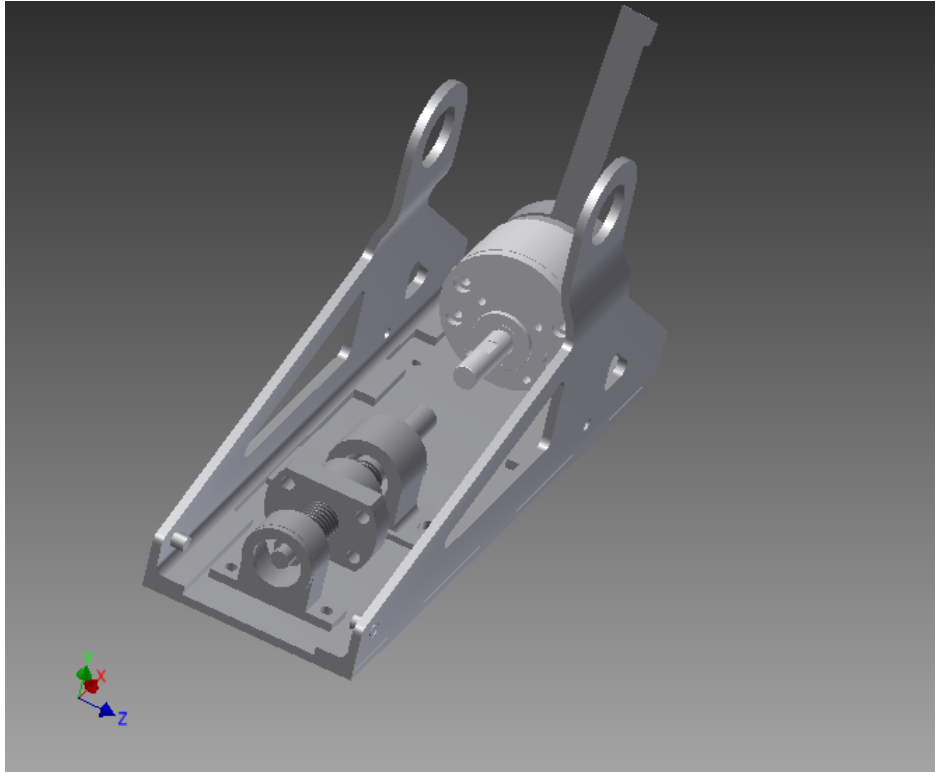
The foot sagittal and bottom structure, with the motor and gearbox at the back and the ball screw assembly with the screw, nut and two pillow blocks.
